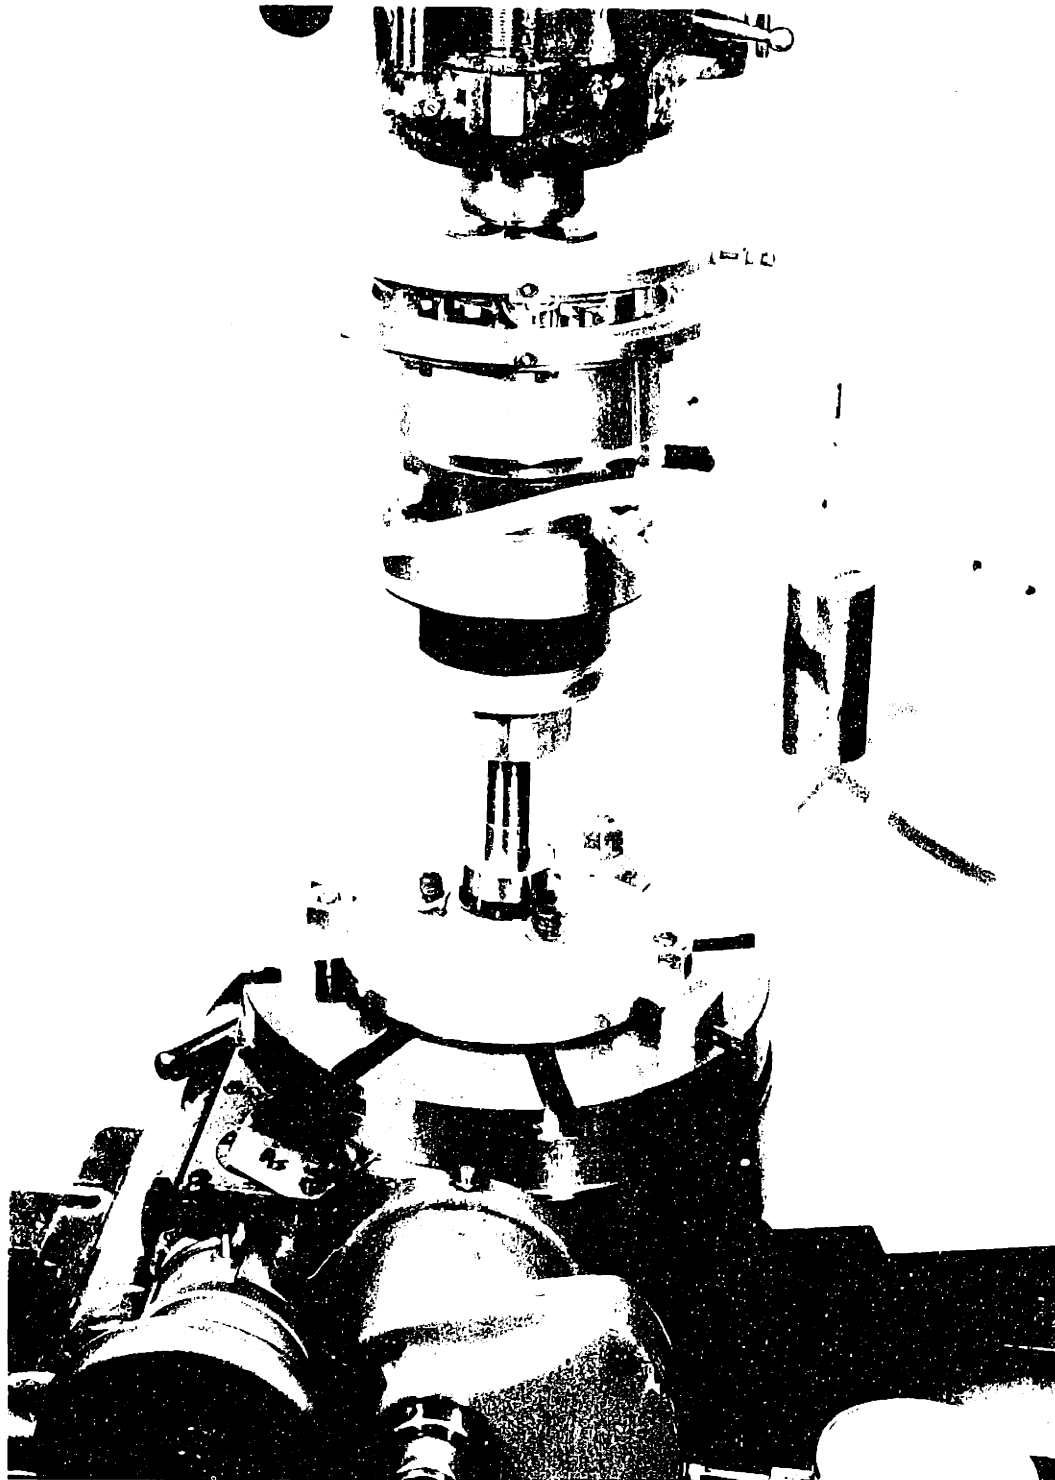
Close-up view of the insertion of the steel test plug into a drill bushing using simplified apparatus and the more sensitive aluminum six-axis force sensor.
